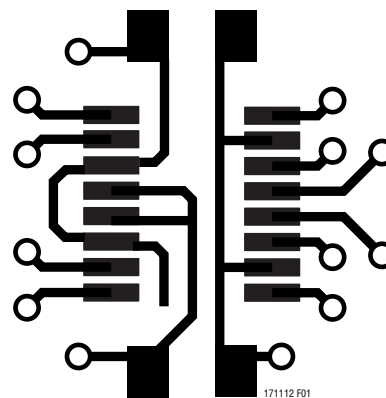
Typical LT1712 Topside Metal for Multilayer PCB Layout
